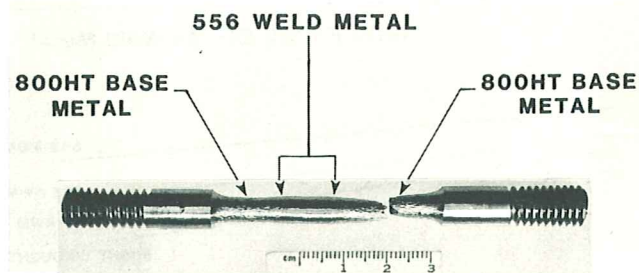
Room temperature transverse weldment tensile test specimen. Fracture occurred in alloy 800HT base metal well away from weld zone.
